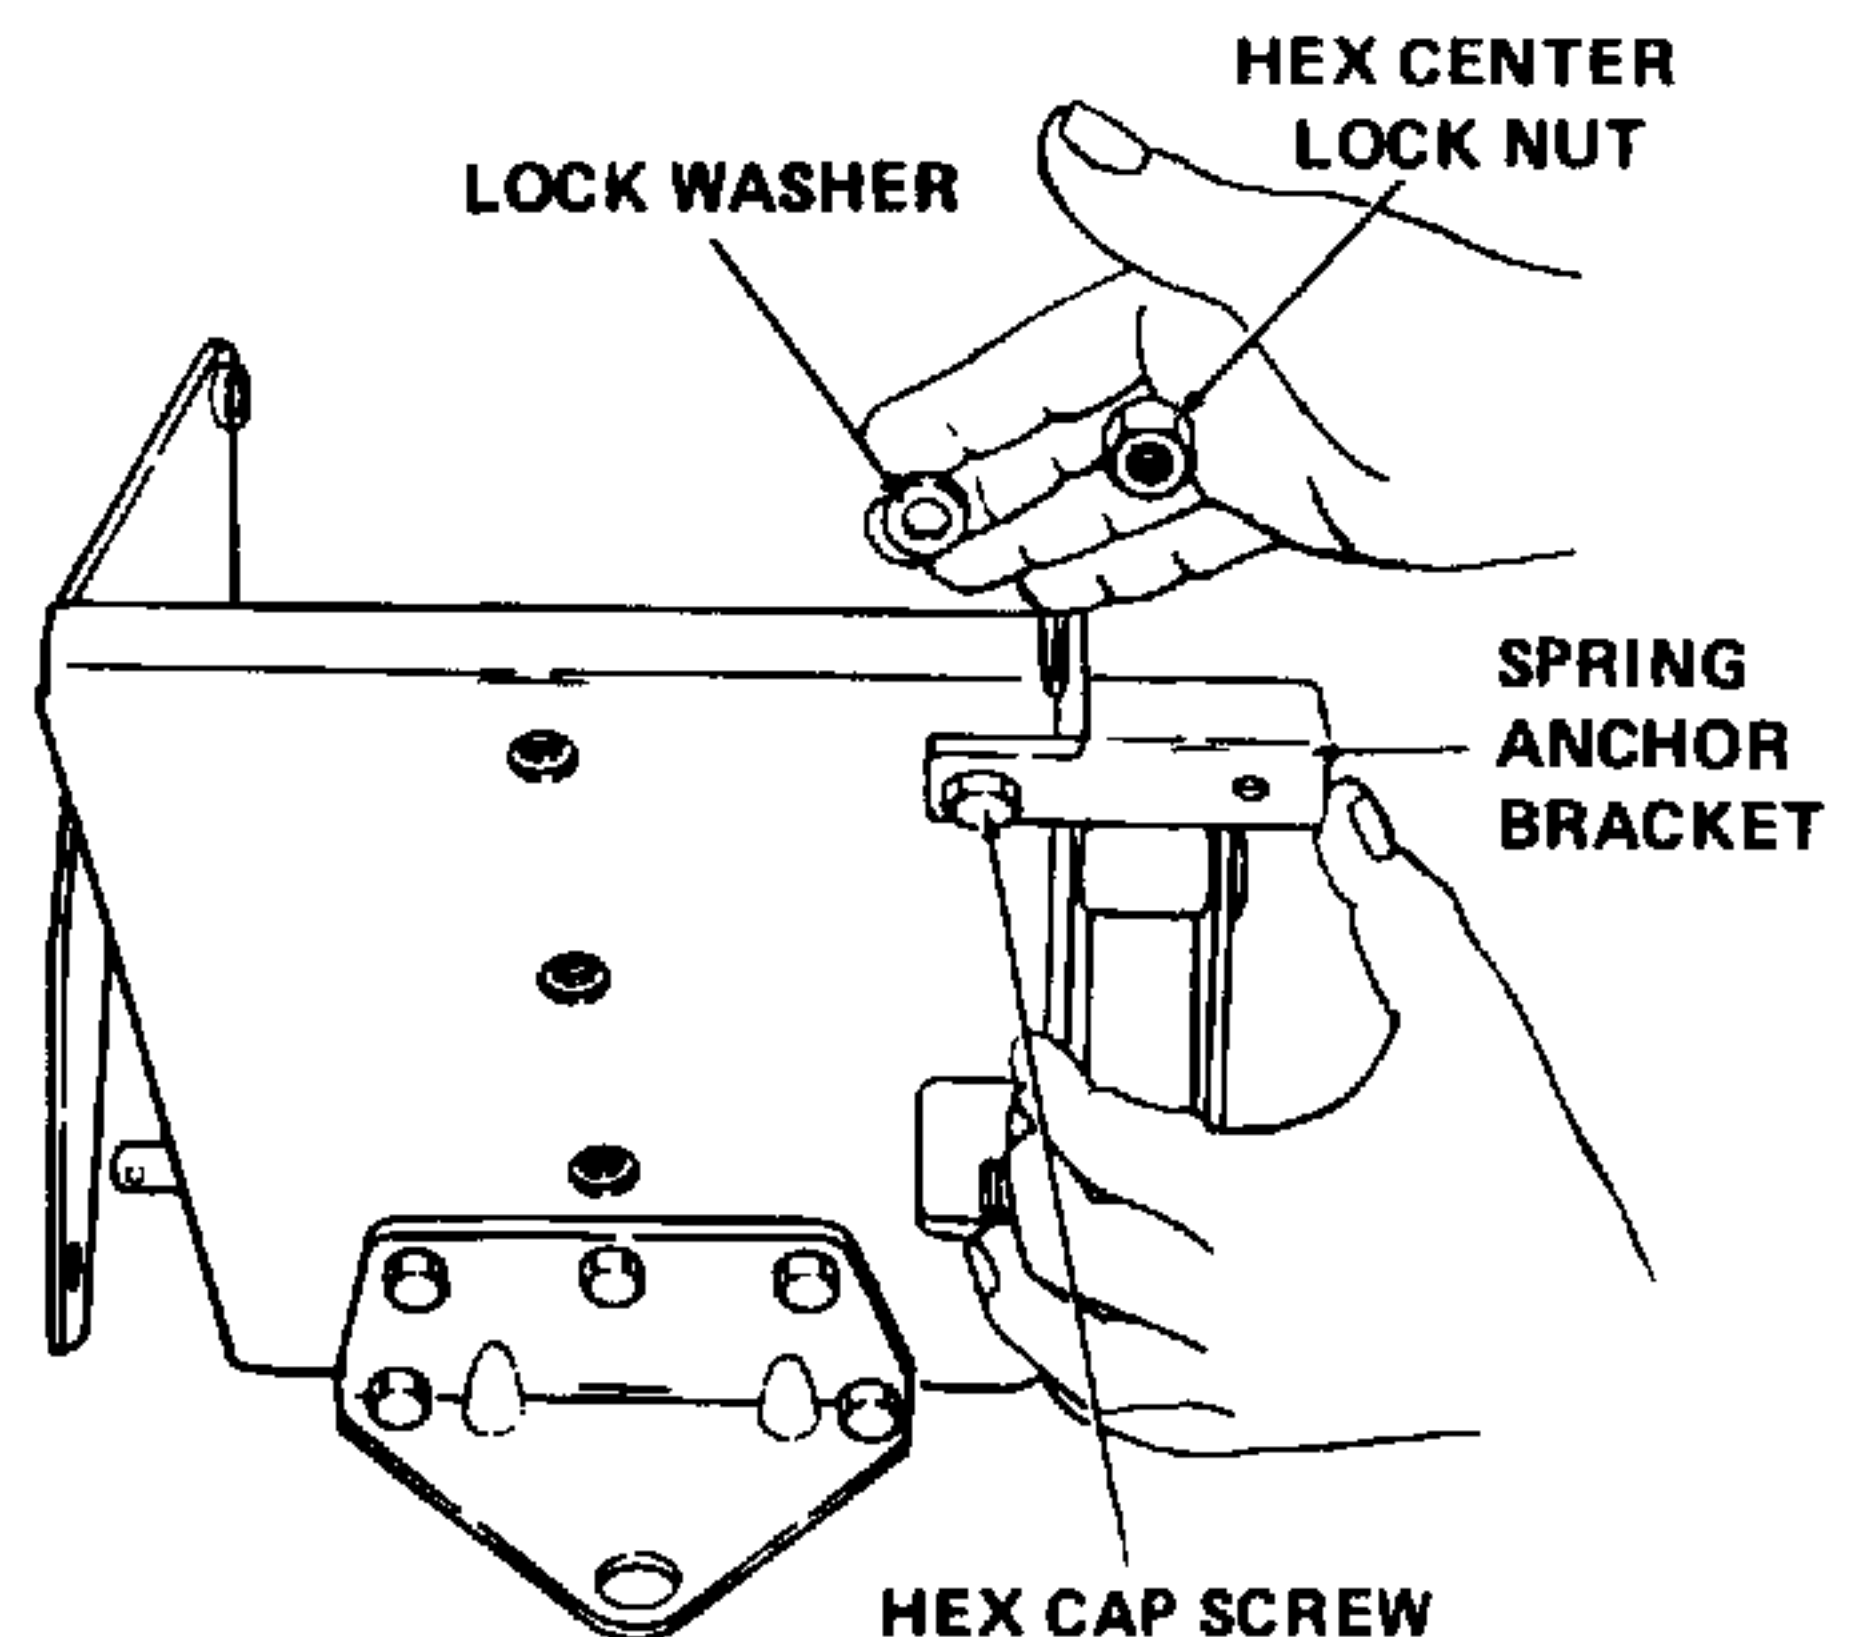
Assembling Spring Anchor Bracket to Hitch Plate Assembly (Manual Lift Tractors).
